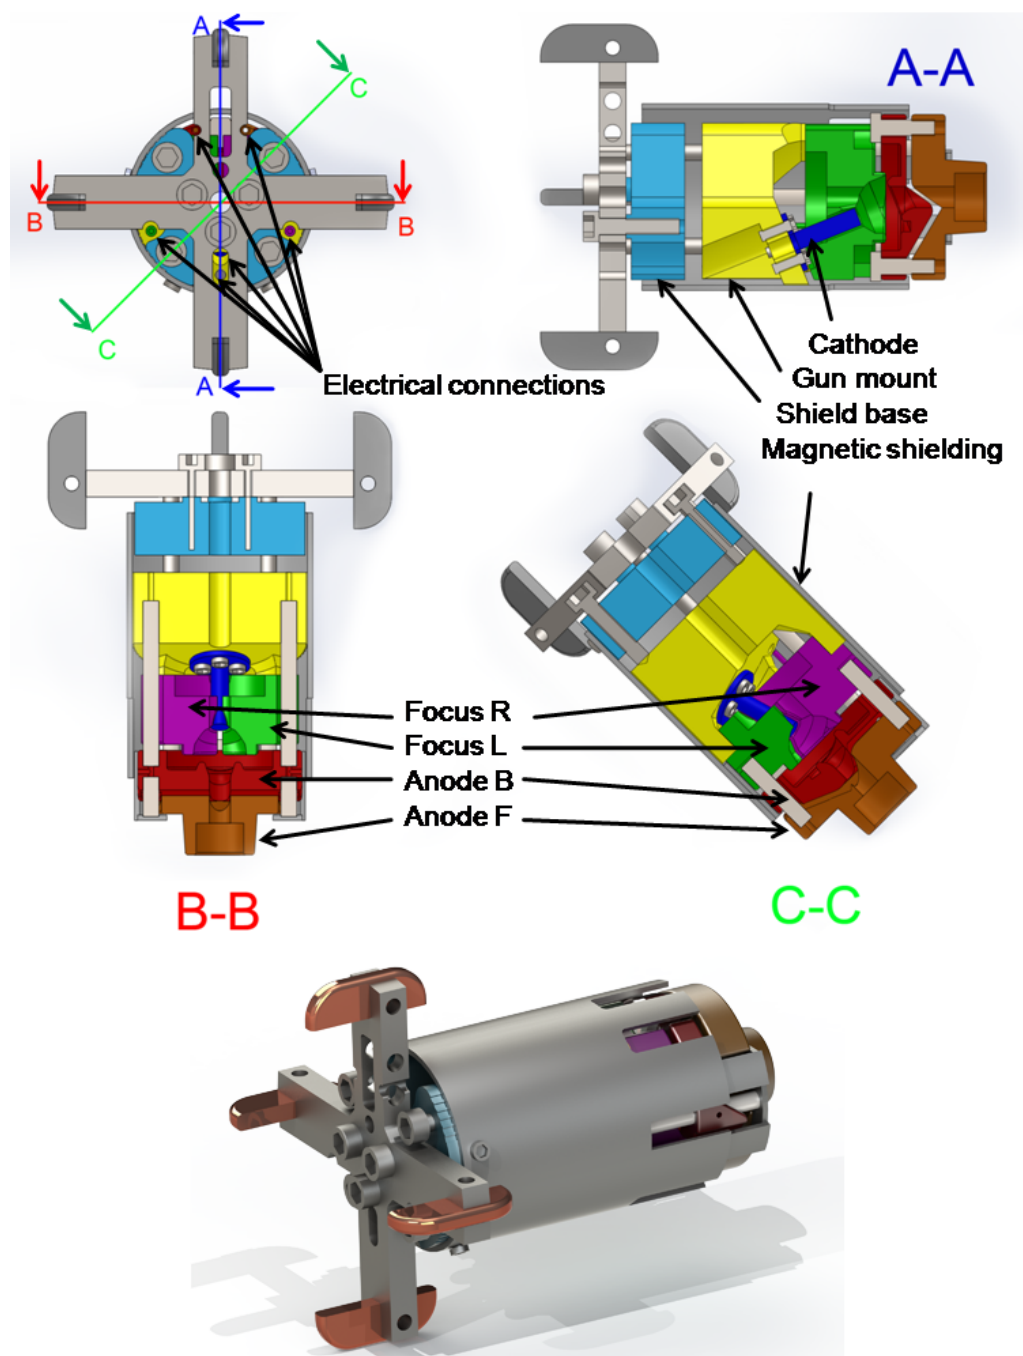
Overview of the OAG design: back view (top left), side cutaway view (A-A)(top right), top cutaway view (B-B)(bottom left), and diagonal cutaway view (C-C)(bottom right). The back view shows the electrical connections, while the electrodes can be seen in the cutaway views. The electrodes are: cathode (blue), focus L (green), focus R (purple), anode B (red), and anode F (brown).
